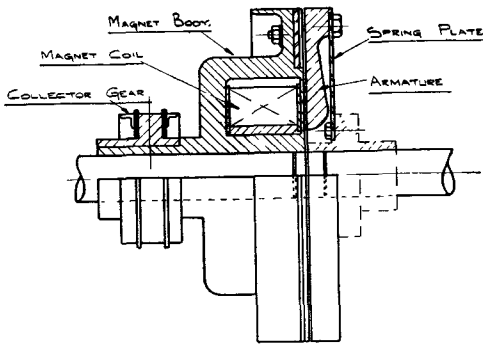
SECTION OF MAGNETIC CLUTCH.
